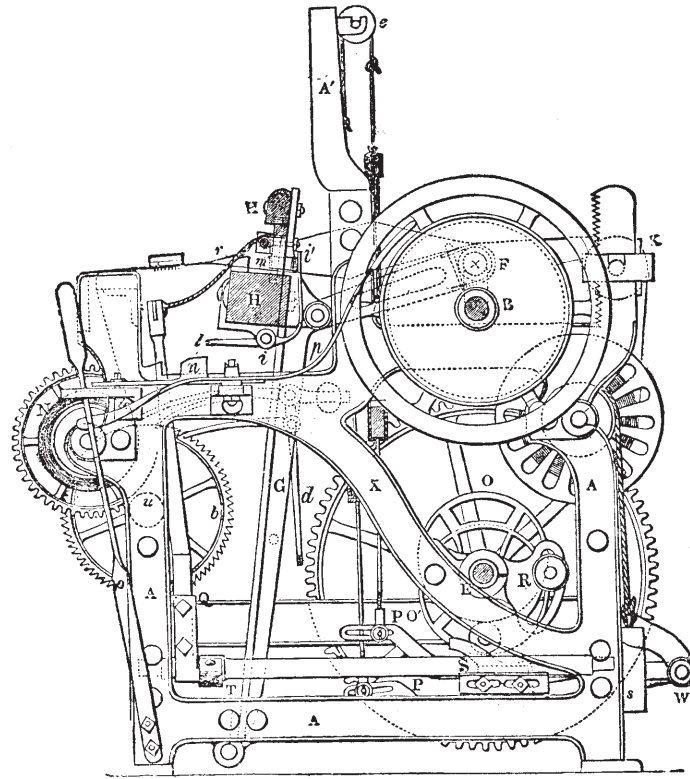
ROBERTS LOOM. SIDE ELEVATION.
